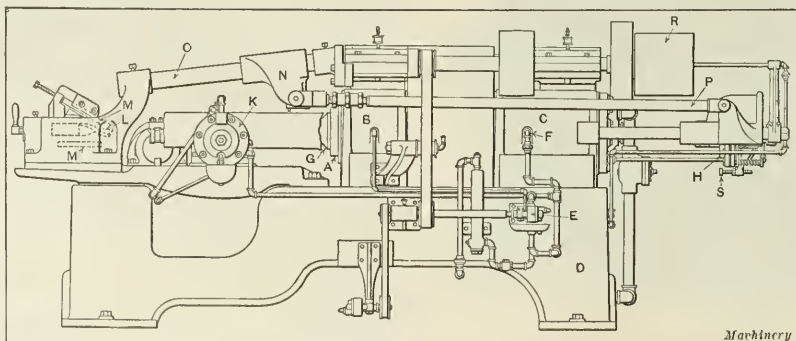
Warren Hydraulic Lathe, showing Drill and End Facing Tools
